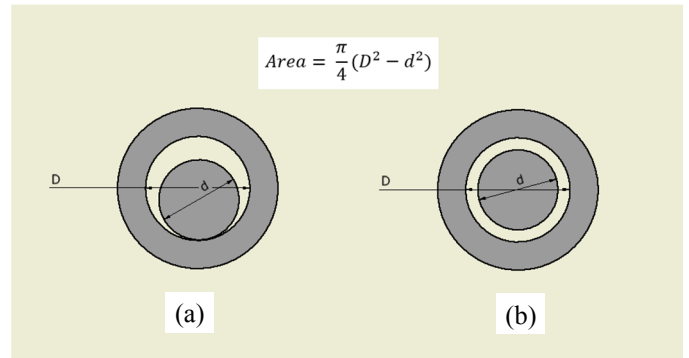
shape of shaft/bearing clearance when; (a) the shaft is stationary (b) the shaft is rotating at a very high speed and lifted due to the lubricant.
